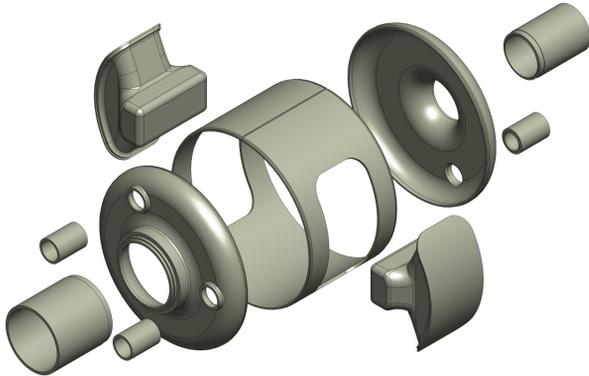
An exploded view of the individual Niobium components that will be welded together to form the cavity.
